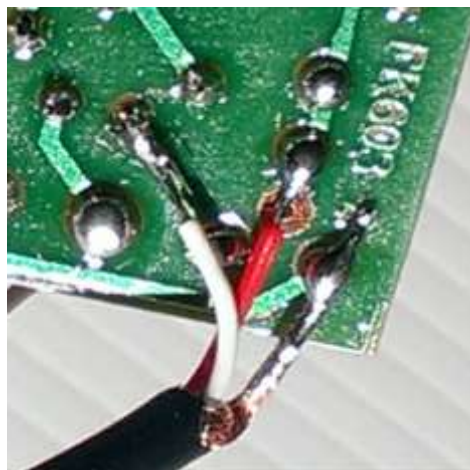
Showing wires soldered to the Left volume control points on the PCB.
